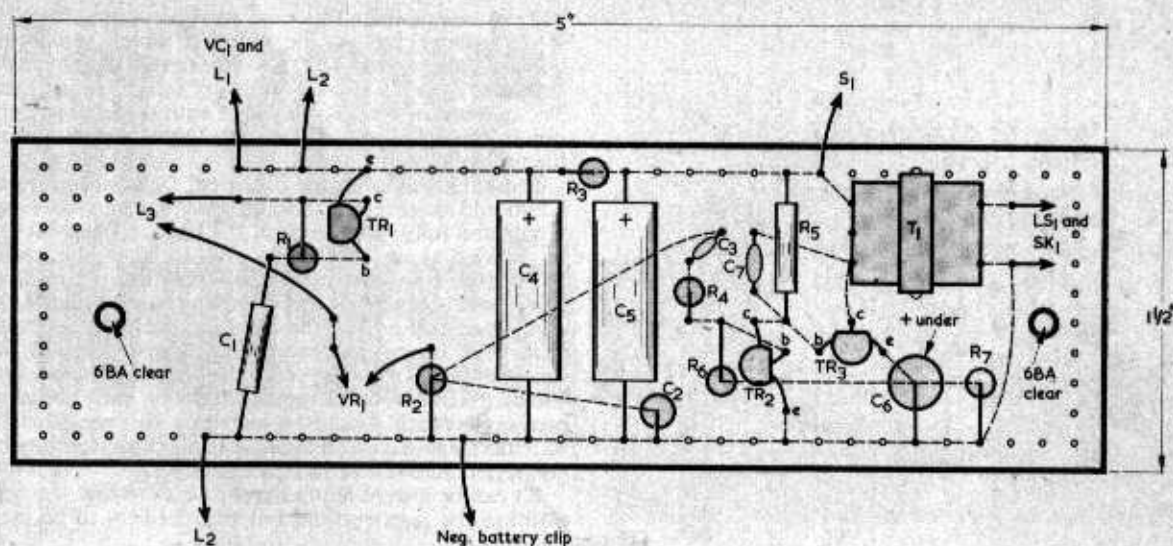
The smaller components are assembled on a plain Veroboard panel, shown here as viewed from the component side
